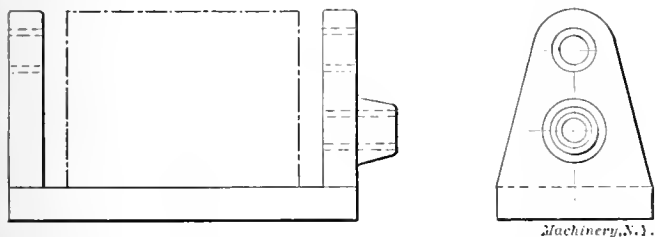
Boring Jig in which One Bar has Single and One Double Bearing.
